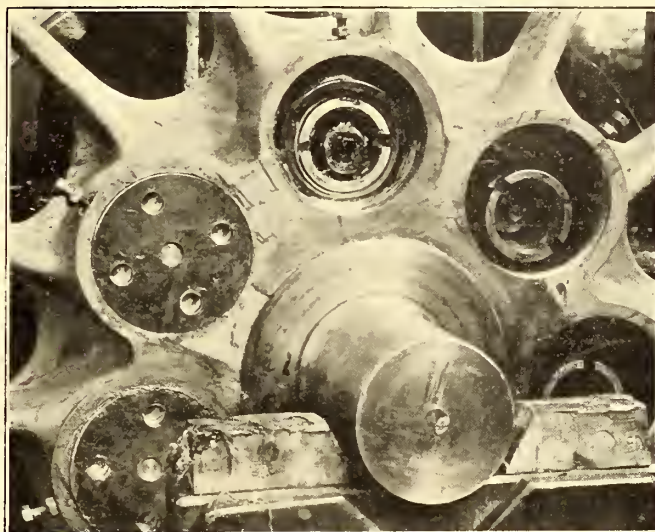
DETAIL OF DRIVING WHEEL, SHOWING POCKETS
